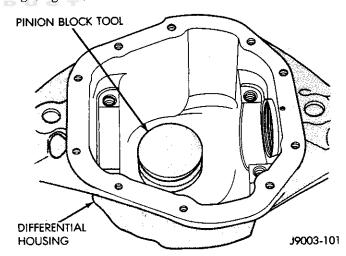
Pinion Block Tool Inserted In Shaft Bore
